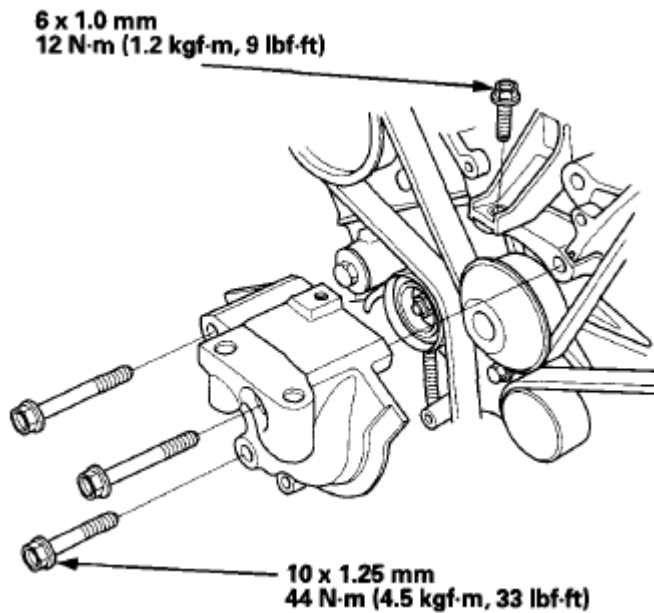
Installing Lower Half Of Side Engine Mount Bracket With Torque Specifications
